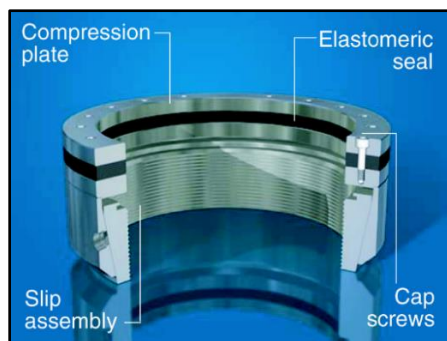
Illustration of a mechanical-set slip-and-seal assembly in sub-mudline liner hanger assembly (Speer 2006)
